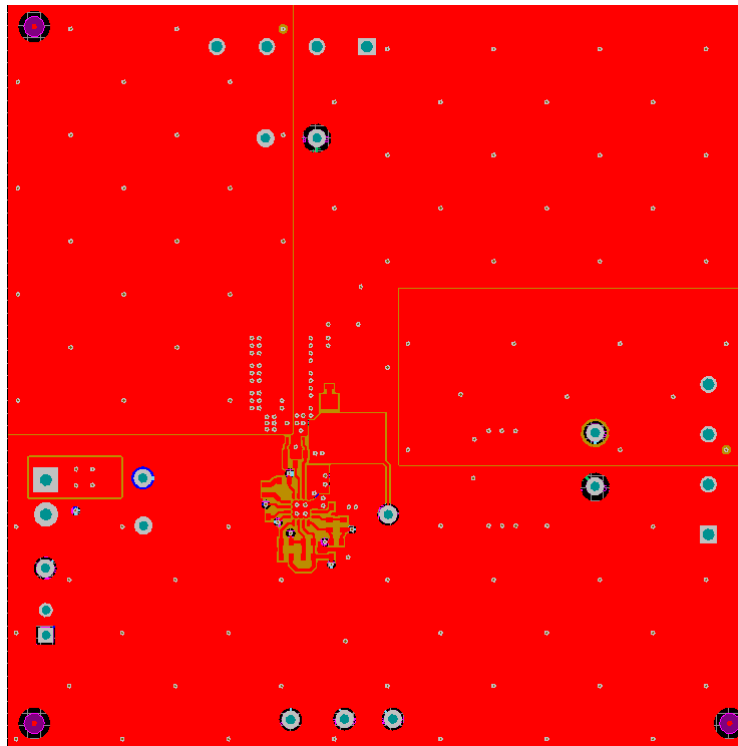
CSD87381PEVM-603 Top Copper (Top View)
